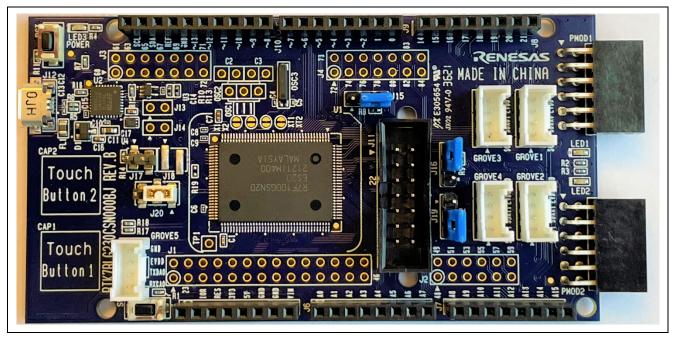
RL78/G23-128p Fast Prototyping Board after soldering (Top Side)
